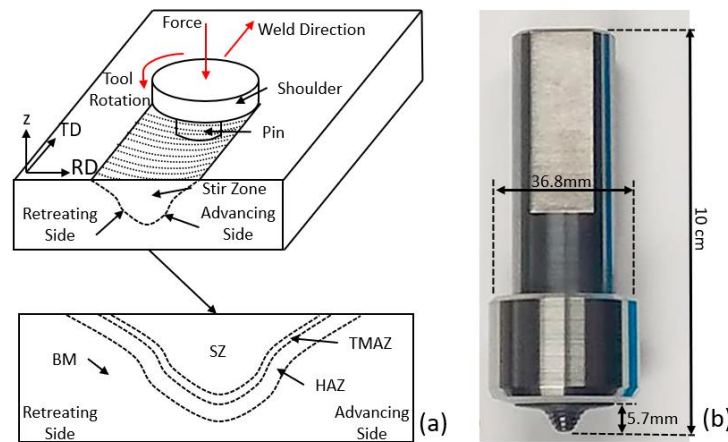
(a) Friction stir welding process and microstructural zone illustration, (b) polycrystalline cubic boron nitride tool used for repair welding.
